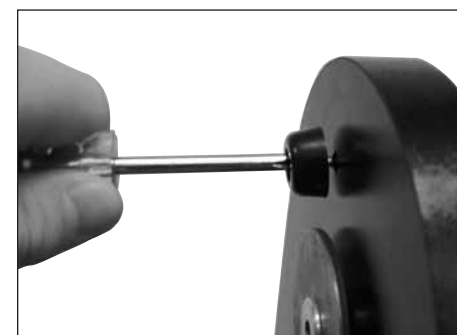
Install the bumper into the pilot hole above the altitude encoder assembly.
